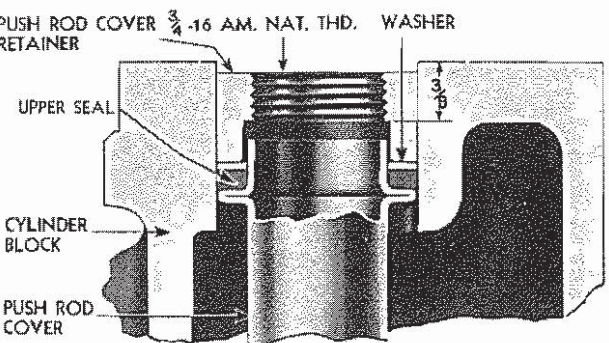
Location Of Push Rod Cover Retainer And Seal
